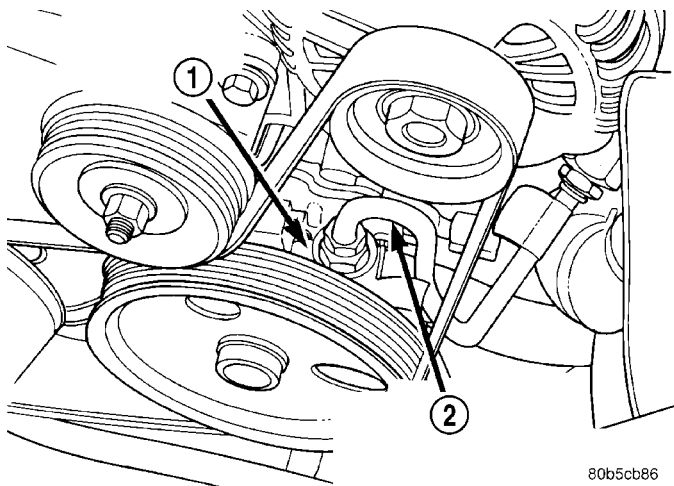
Pressure Hose Connection To Power Steering Pump (/3.5L Engine)
